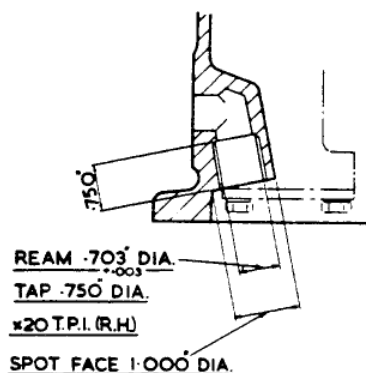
SECTION SHOWING MODIFICATION TO CRANKCASE FOR OIL FEED STANDPIPE.
